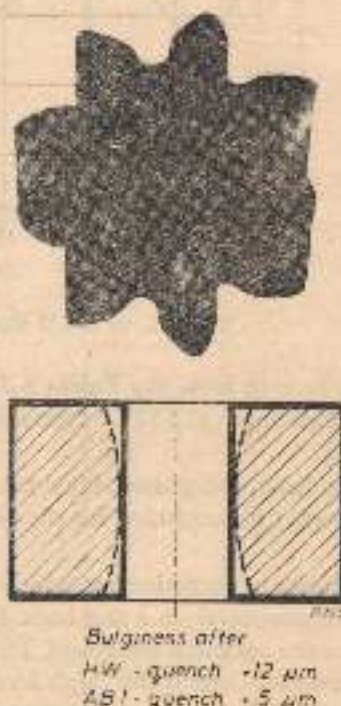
(b) Change in dimensions in oil-pump gear
